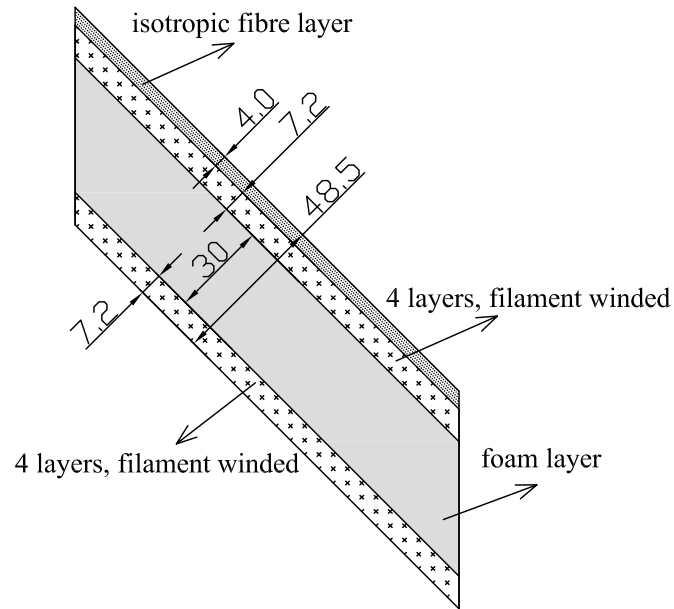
Layer construction and thickness - buoy with foam layer, dimensions in mm.
